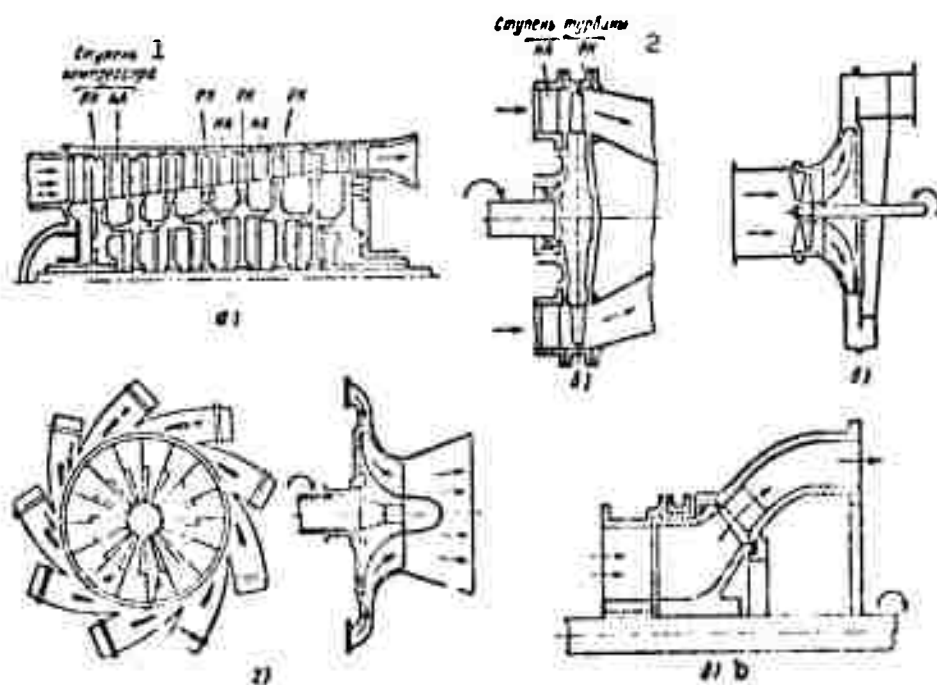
Types of turbines. a) Eight-stage axial-flow compressor; b) single-stage axial-flow turbine; c) centrifugal compressor; d) radial-centripetal turbine. 1) Stage of compressor; 2) stage of turbine.
